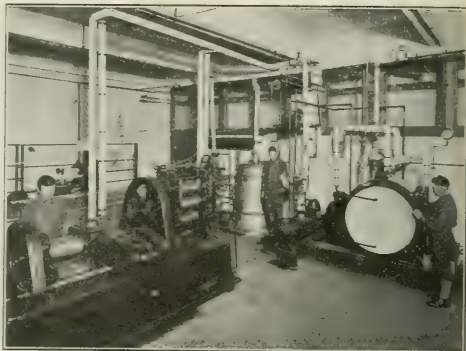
LONG ISLAND LABORATORY. EXPERIMENTAL RUBBER LABORATORY FOR MANUFACTURE OF RUBBER PARTS ON SMALL SCALE
